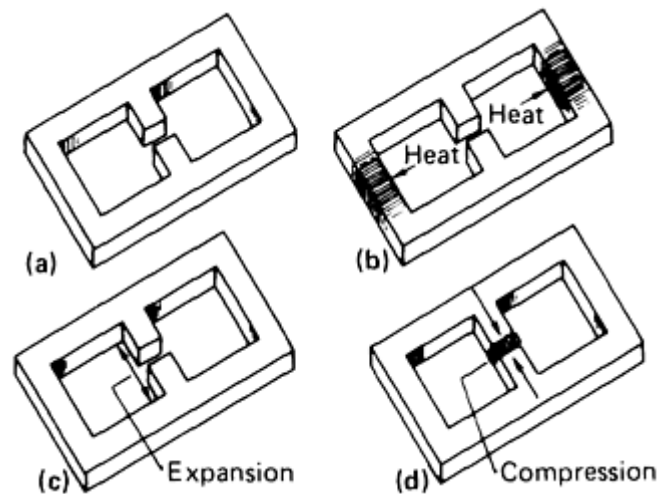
PROPER METHOD OF PREHEATING CAST IRON CASTINGS TO PREPARE SAMPLES FOR WELDING. (A) CASTING AT ROOM TEMPERATURE. (B) HEAT APPLIED TO PERIMETER OF CASTING. (C) VERTICAL MEMBERS OF CASTING IN TENSION. (D) VERTICAL MEMBERS IN COMPRESSION READY TO BE WELDED
